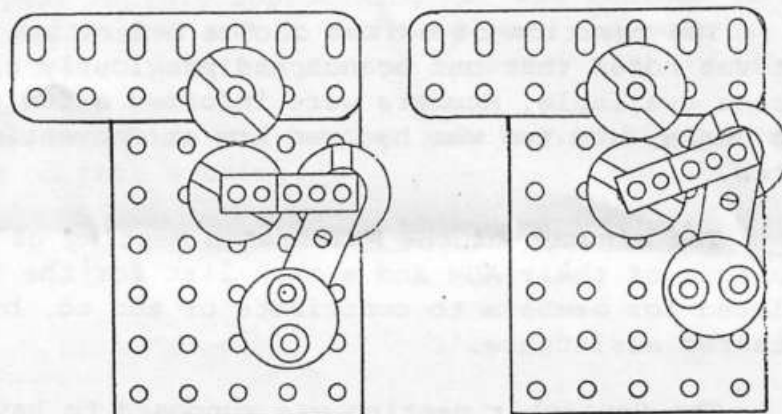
Cross-section showing how the third roller is raised or lowered by rotating the eccentrics.
